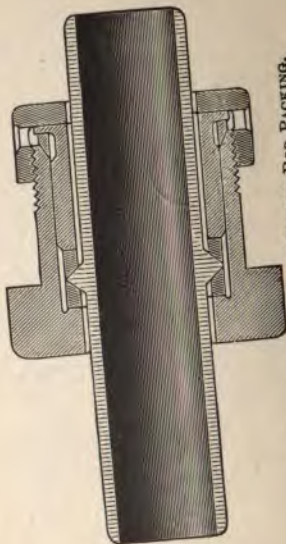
"STRAIGHT-LINE" PISTON ROD PACKING.
